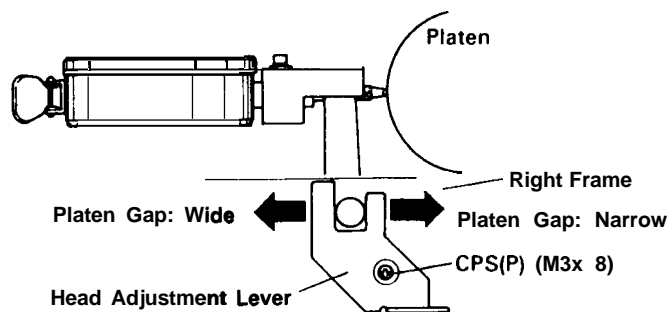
Head Adjustment Lever Mounting Position Adjustment
